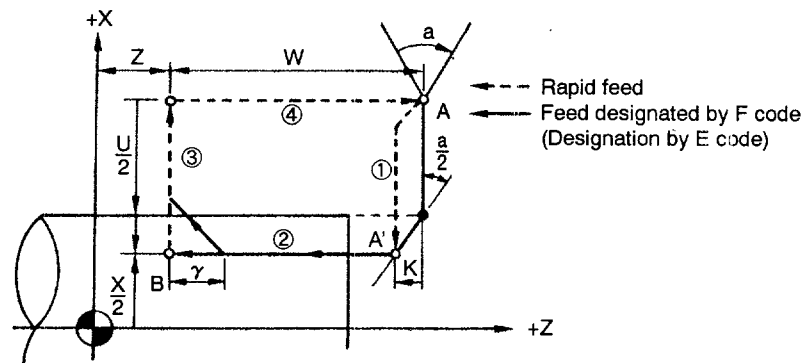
Straight Thread Cutting Cycle (In-feed along Thread Angle)
